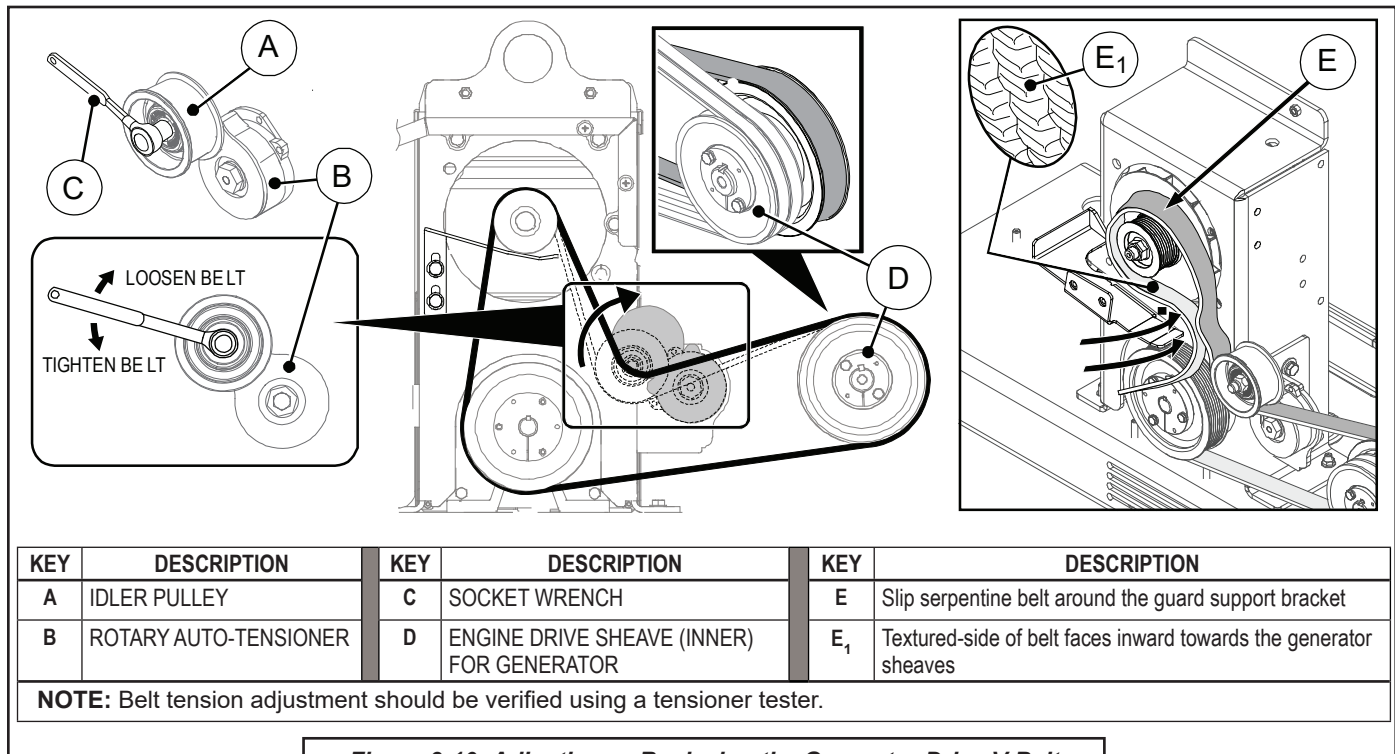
Adjusting or Replacing the Generator Drive V-Belt
